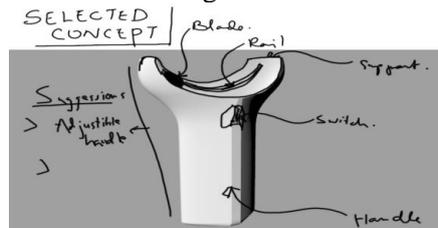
Fusing CAD drawing in the Smart board at the detail design stage
